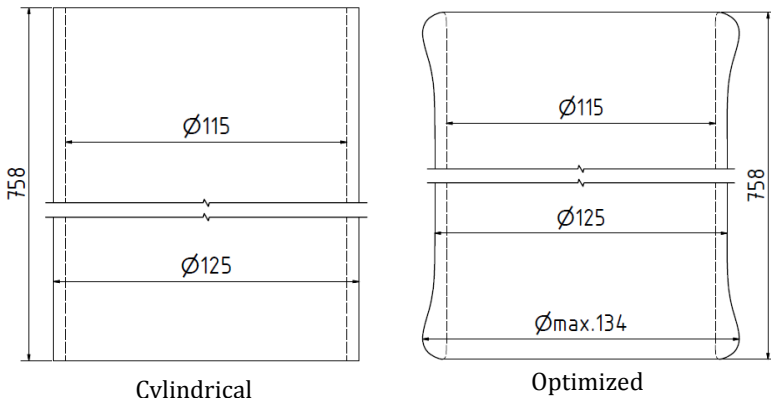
Technical drawings of the two different draft tube designs cylindrical pipe and flow optimized
